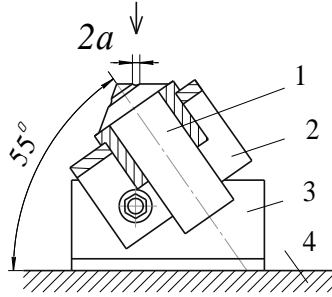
The scheme of cone specimen holder for measuring width of the worn-out groove
